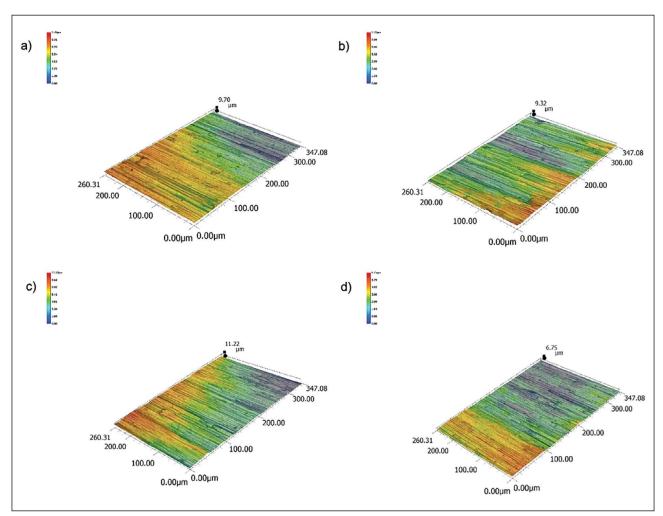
Topography of the machined surfaces with 5° of radial rake cutting tool after drag finishing operation; (a) 4 min. (b) 8 min. (c) 20 min. (d) 40 min.
